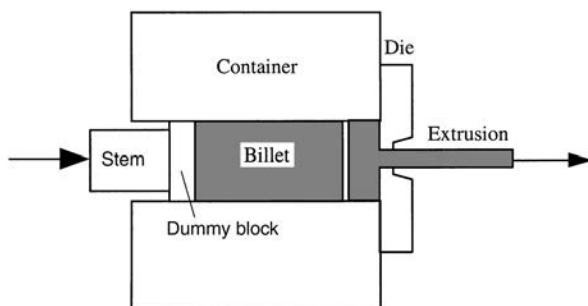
Continuous-type extrusion using welding plate in front of the die (method 1)
